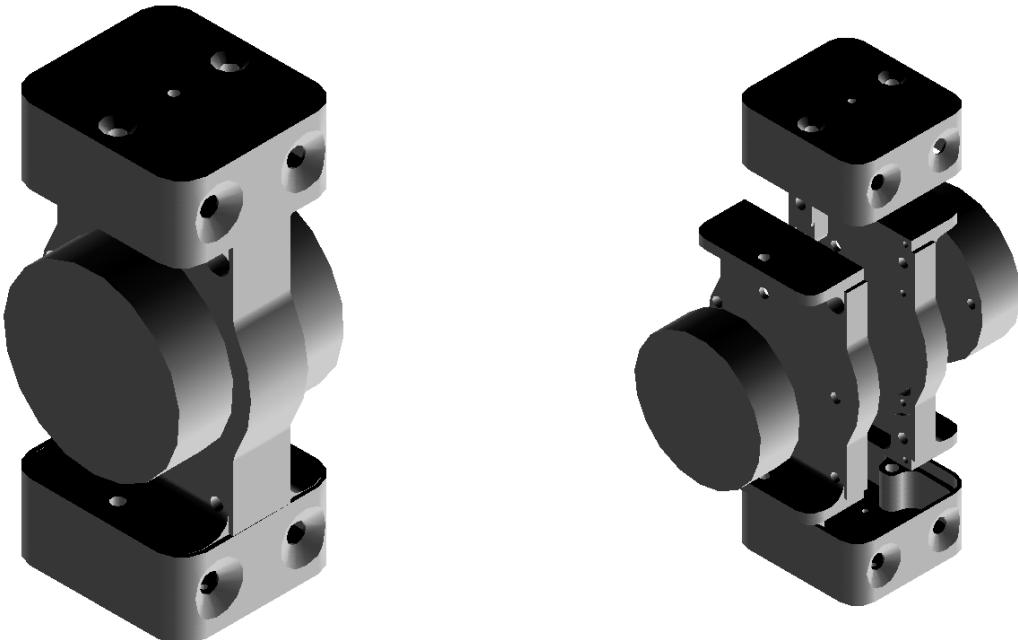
Assembled (left panel) and exploded view (right panel) of the GLM. The two cylinders located at each side of the GLM represent the ATI Mini-40 force and torque transducers.
